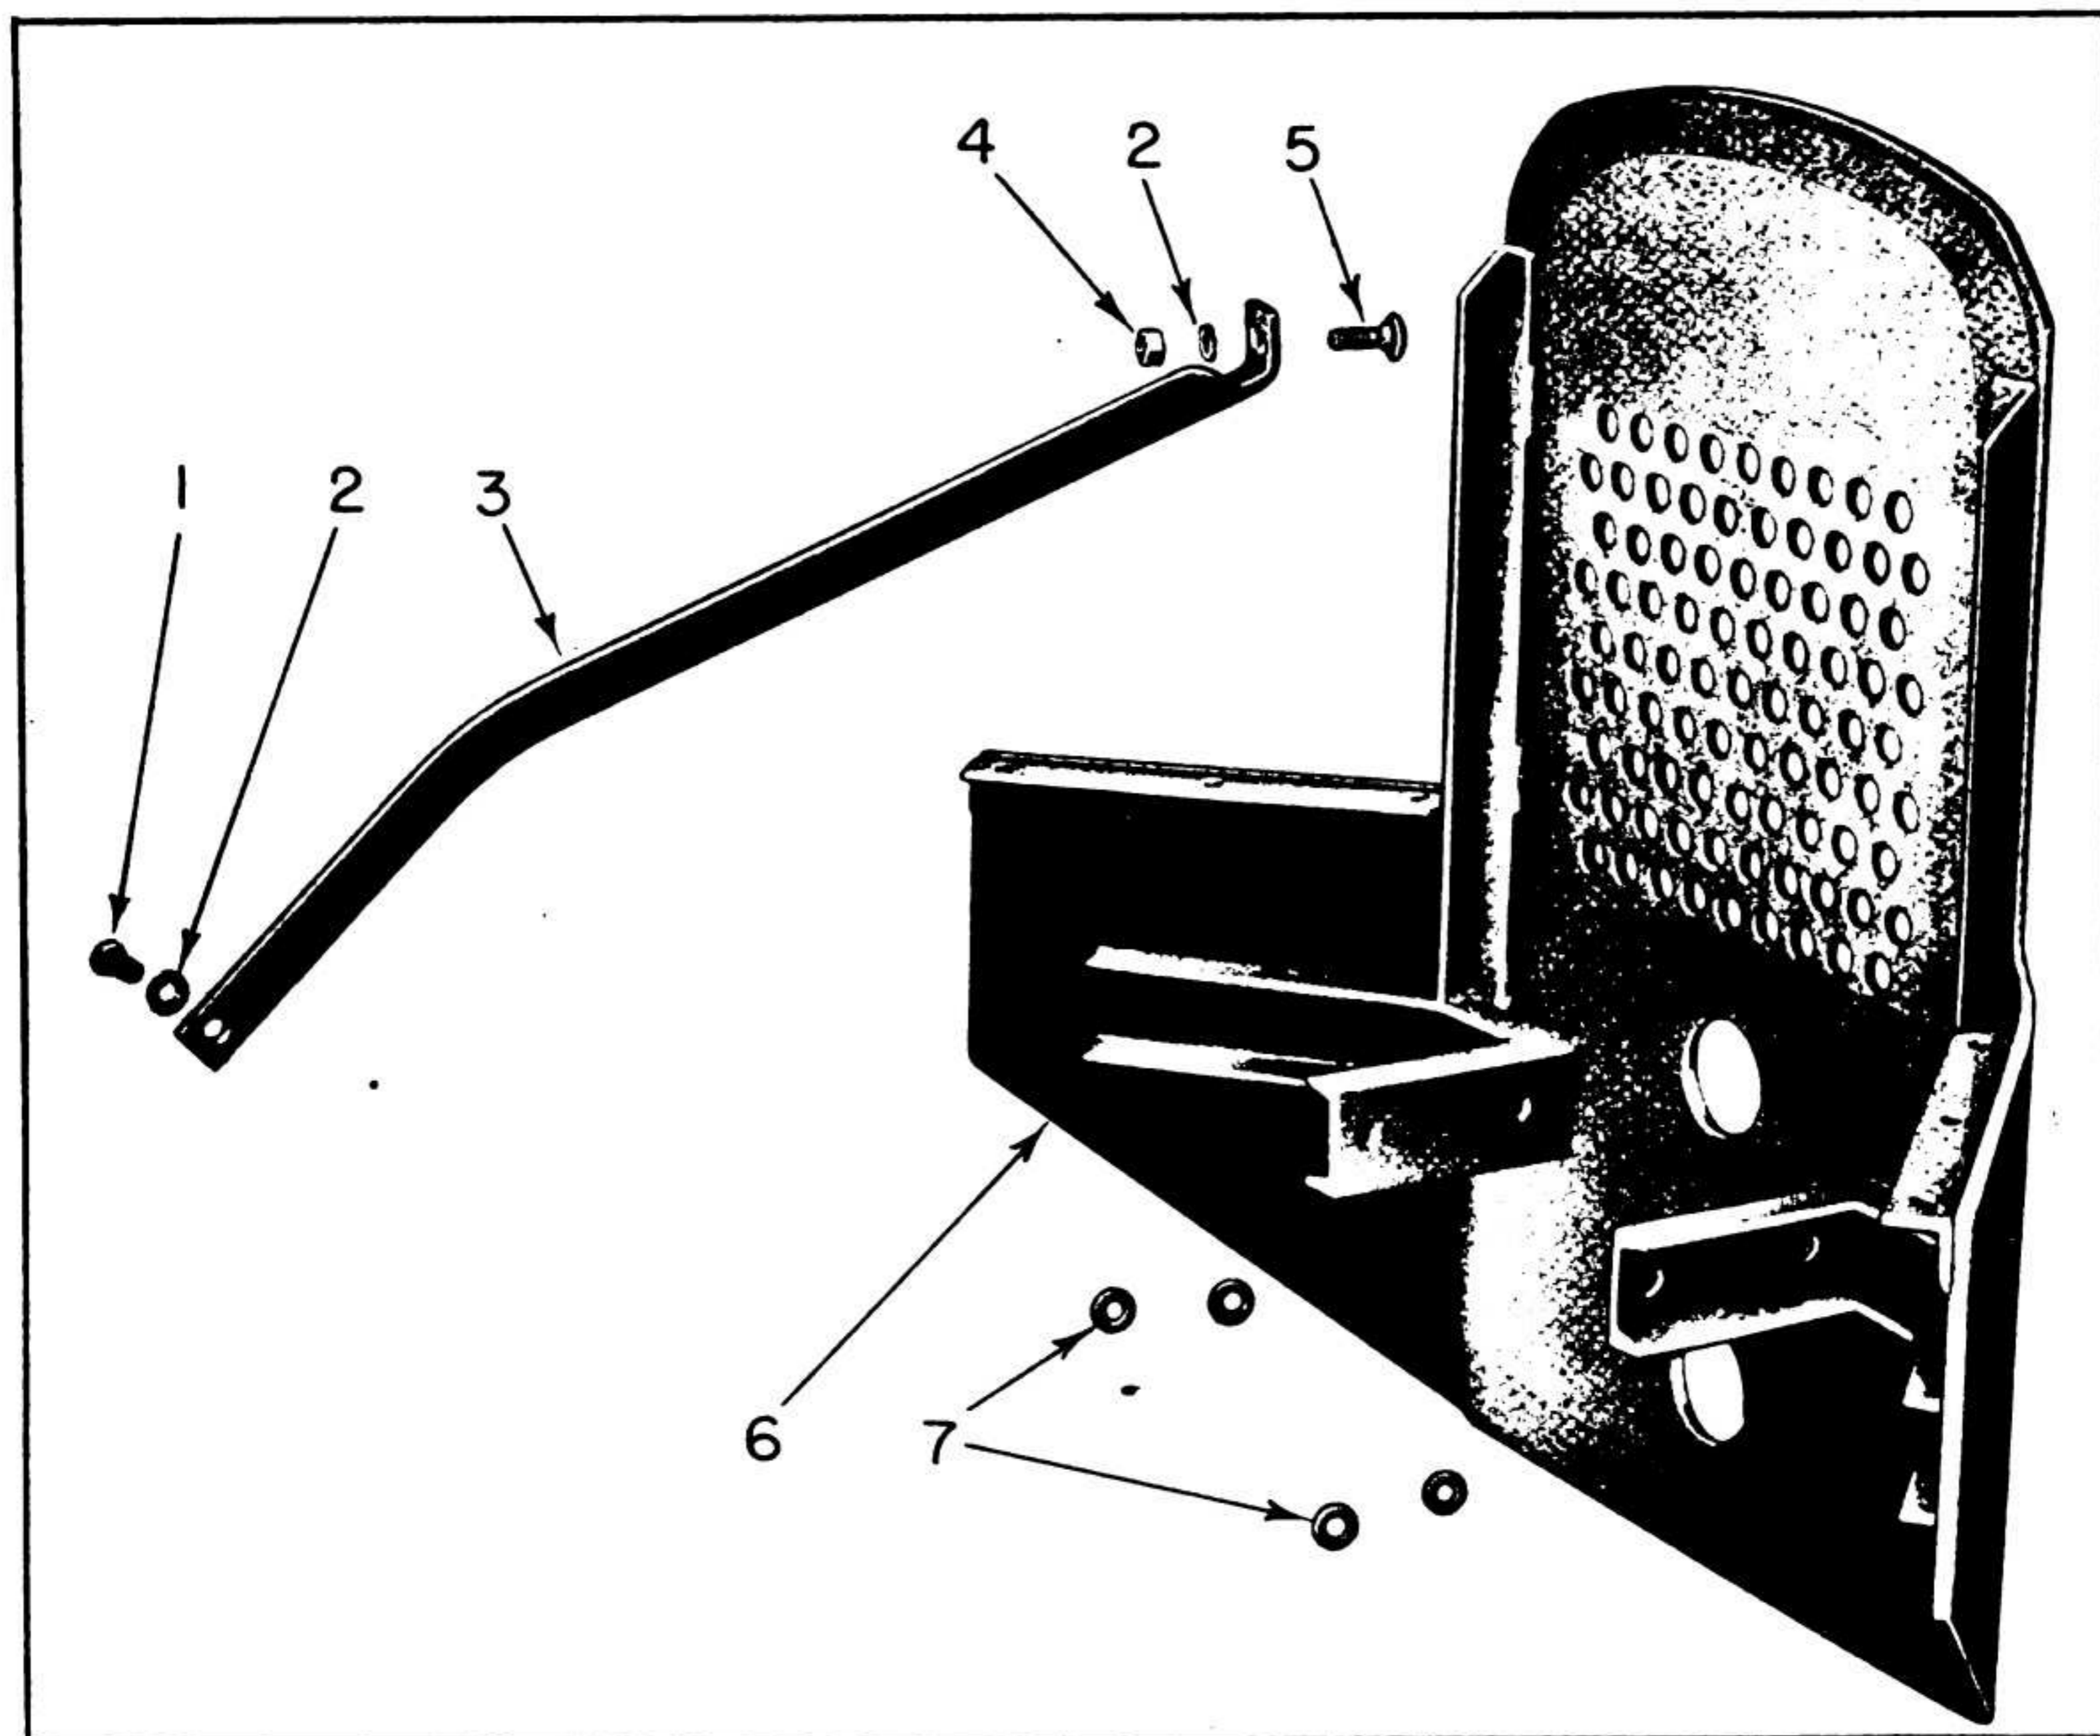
2101 FRONT BUMPER ASSEMBLY
